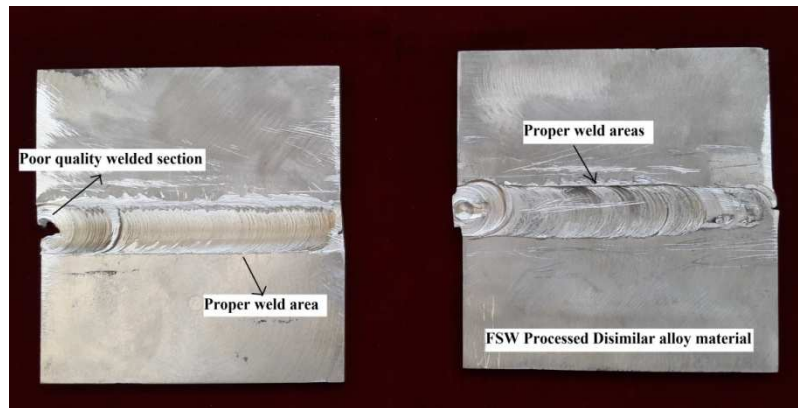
Welded Plates of Dissimilar Alloys Using Same Parameters
